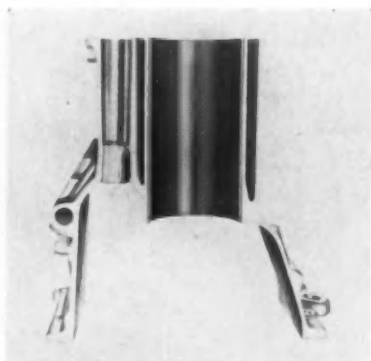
Chrysler die-cast aluminum block is cast around the cylinder sleeves.
